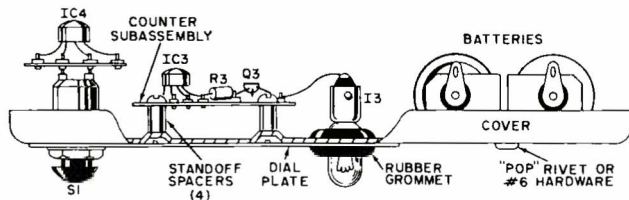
This cutaway view of the front cover shows how the subassembly is mounted on the spacers. Observe that the mounting screw holes are recessed a bit so the dialplate can lay flat on the cover assembly.
